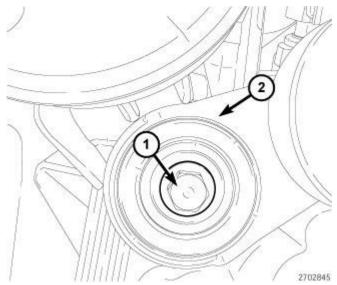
SERPENTINE BELT TENSIONER & BOLT Courtesy of CHRYSLER LLC
